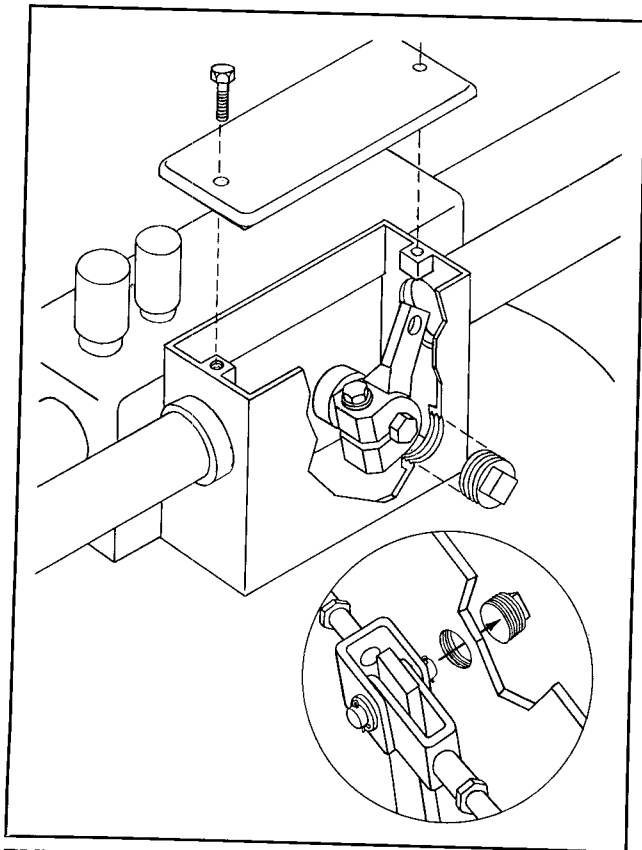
Cutaway View of Pull Rod Housing Box Showing Pull Rod Lever. Inset Shows Access Plug and Clevis Joint Assembly
